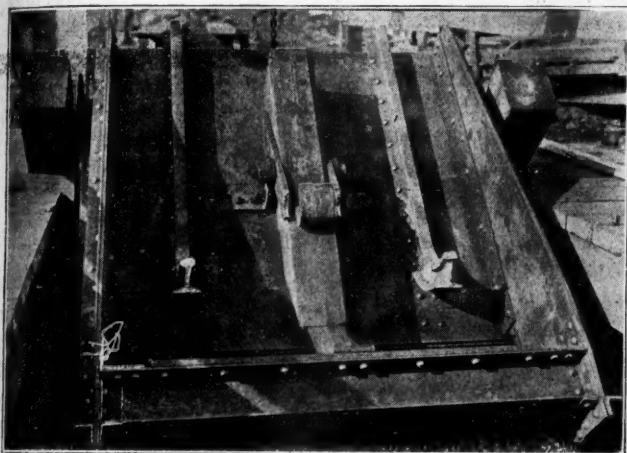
VIEW OF RAILS AFTER BEING CUT
